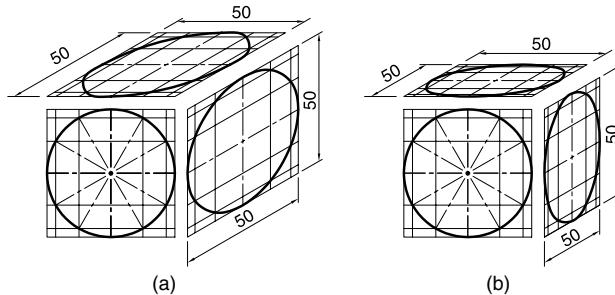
(a) Cavalier projection (b) Cabinet projection
